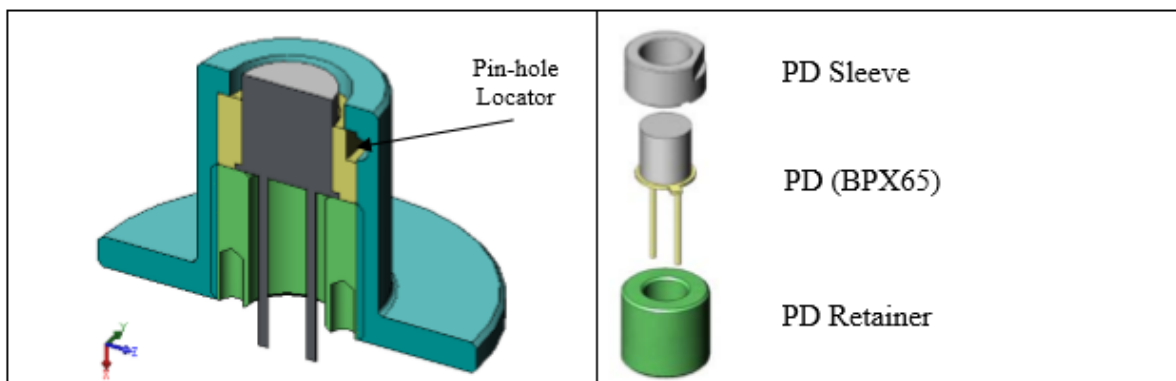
(Left) Section through photodiode carrier. (Right) Photodiode carrier part explosion.
